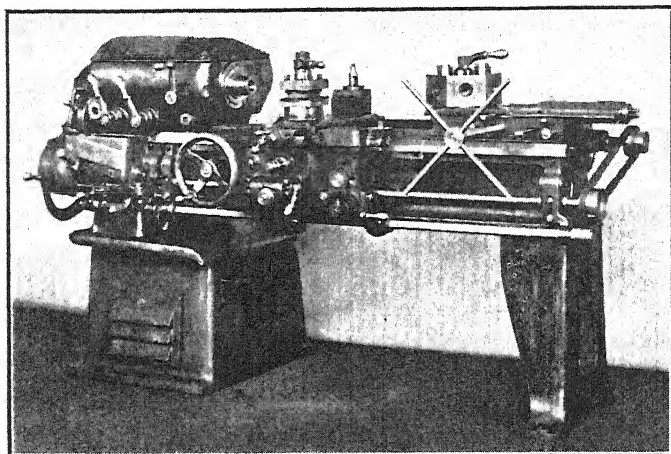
The Reed-Prentice 14-In. Swing Geared-Head Lathe Modified for Limited Production Work.
